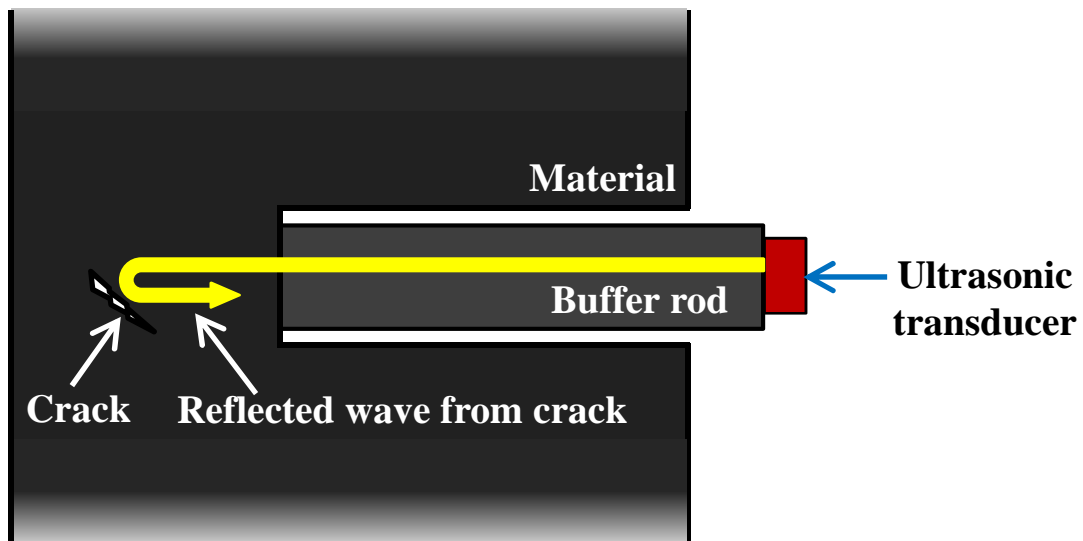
Crack detection in a narrow place of a material using a buffer rod
